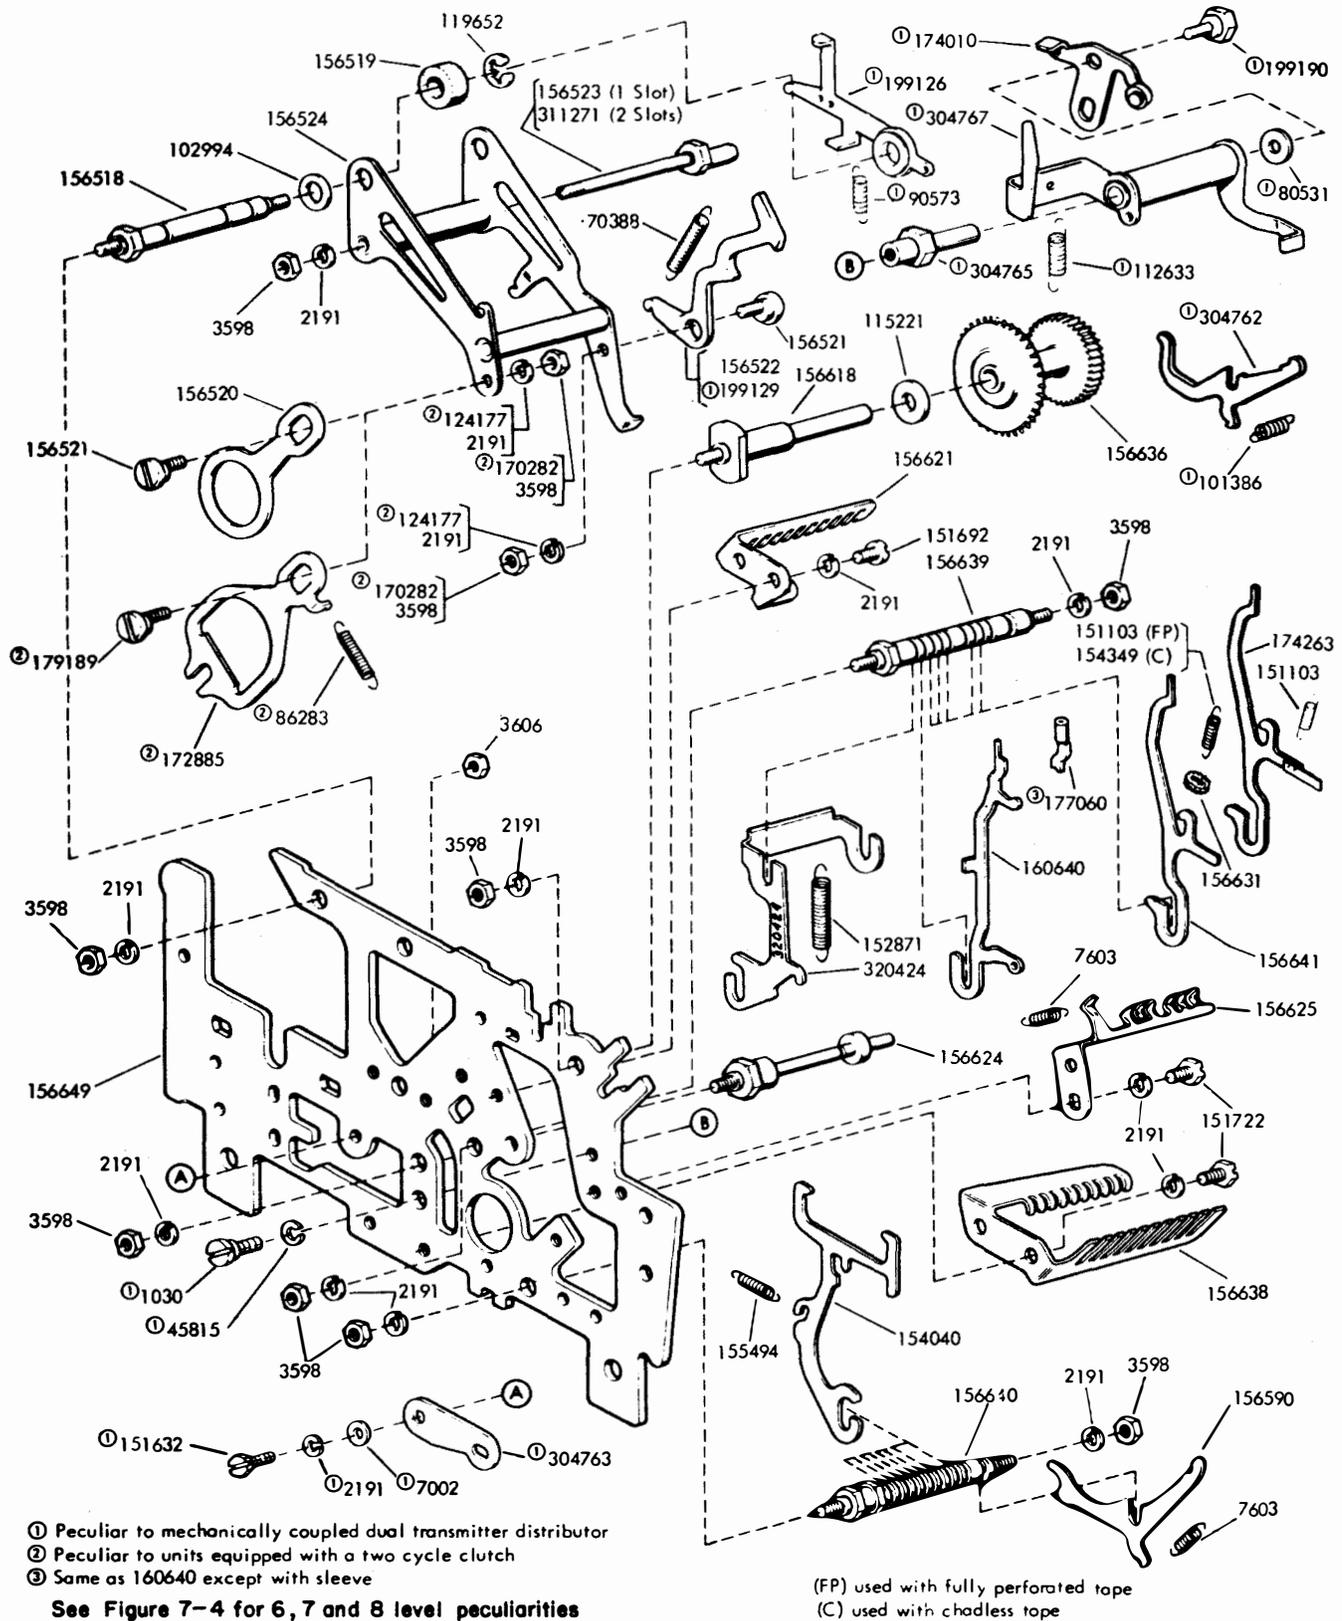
Front Plate Mechanism (Sheet 1 of 3)
